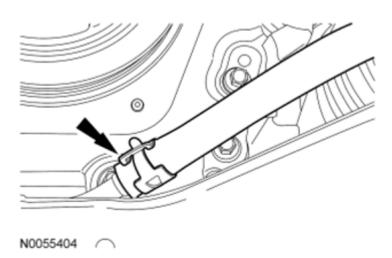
Locating Power Steering Cooler Bracket Bolt Courtesy of FORD MOTOR CO.
